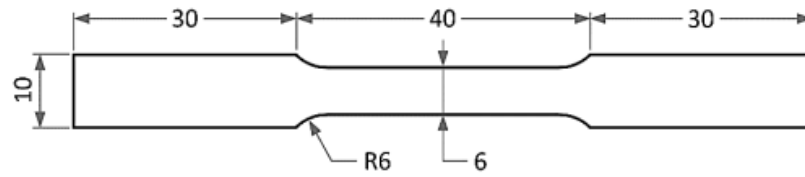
Geometry and dimensions of the tensile specimen in millimeters according to the ASTM E8-11 standard.
